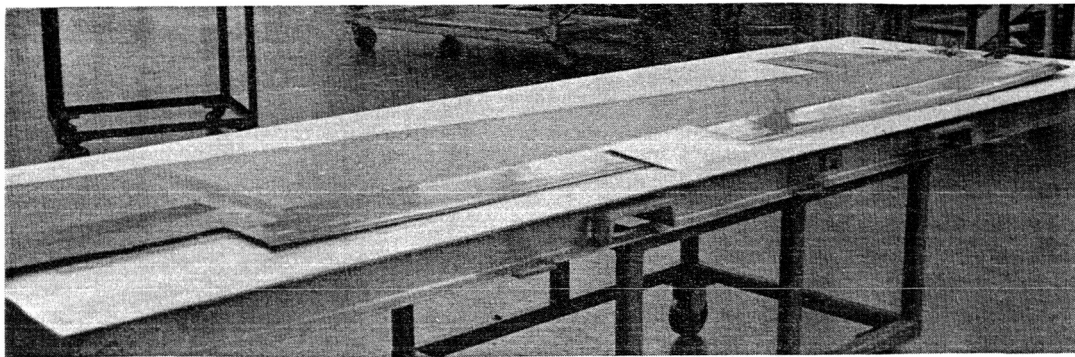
10-ft Test Box (Test 17) Showing Complete Cover Panel
